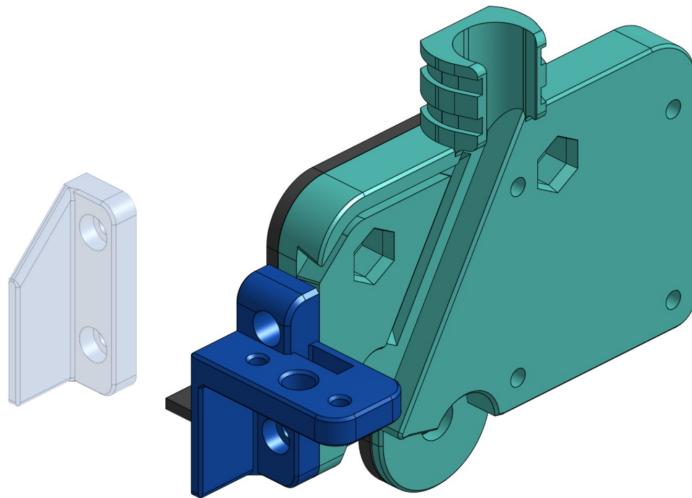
This build requires two printed parts: the main plate (right), and either the BLTouch mount or x-axis extension (left).
